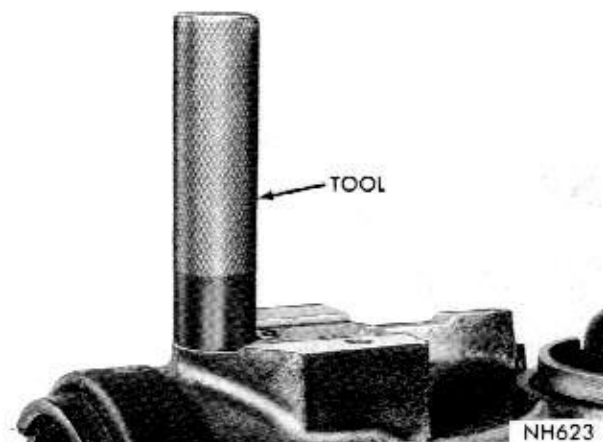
Aligning Center Bearing Spacer With Steering Valve
